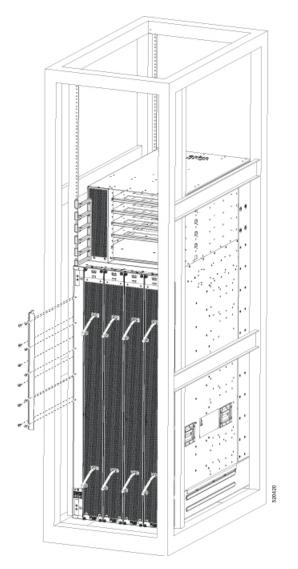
Attach 8818 Chassis to Rack - Rear Left View
